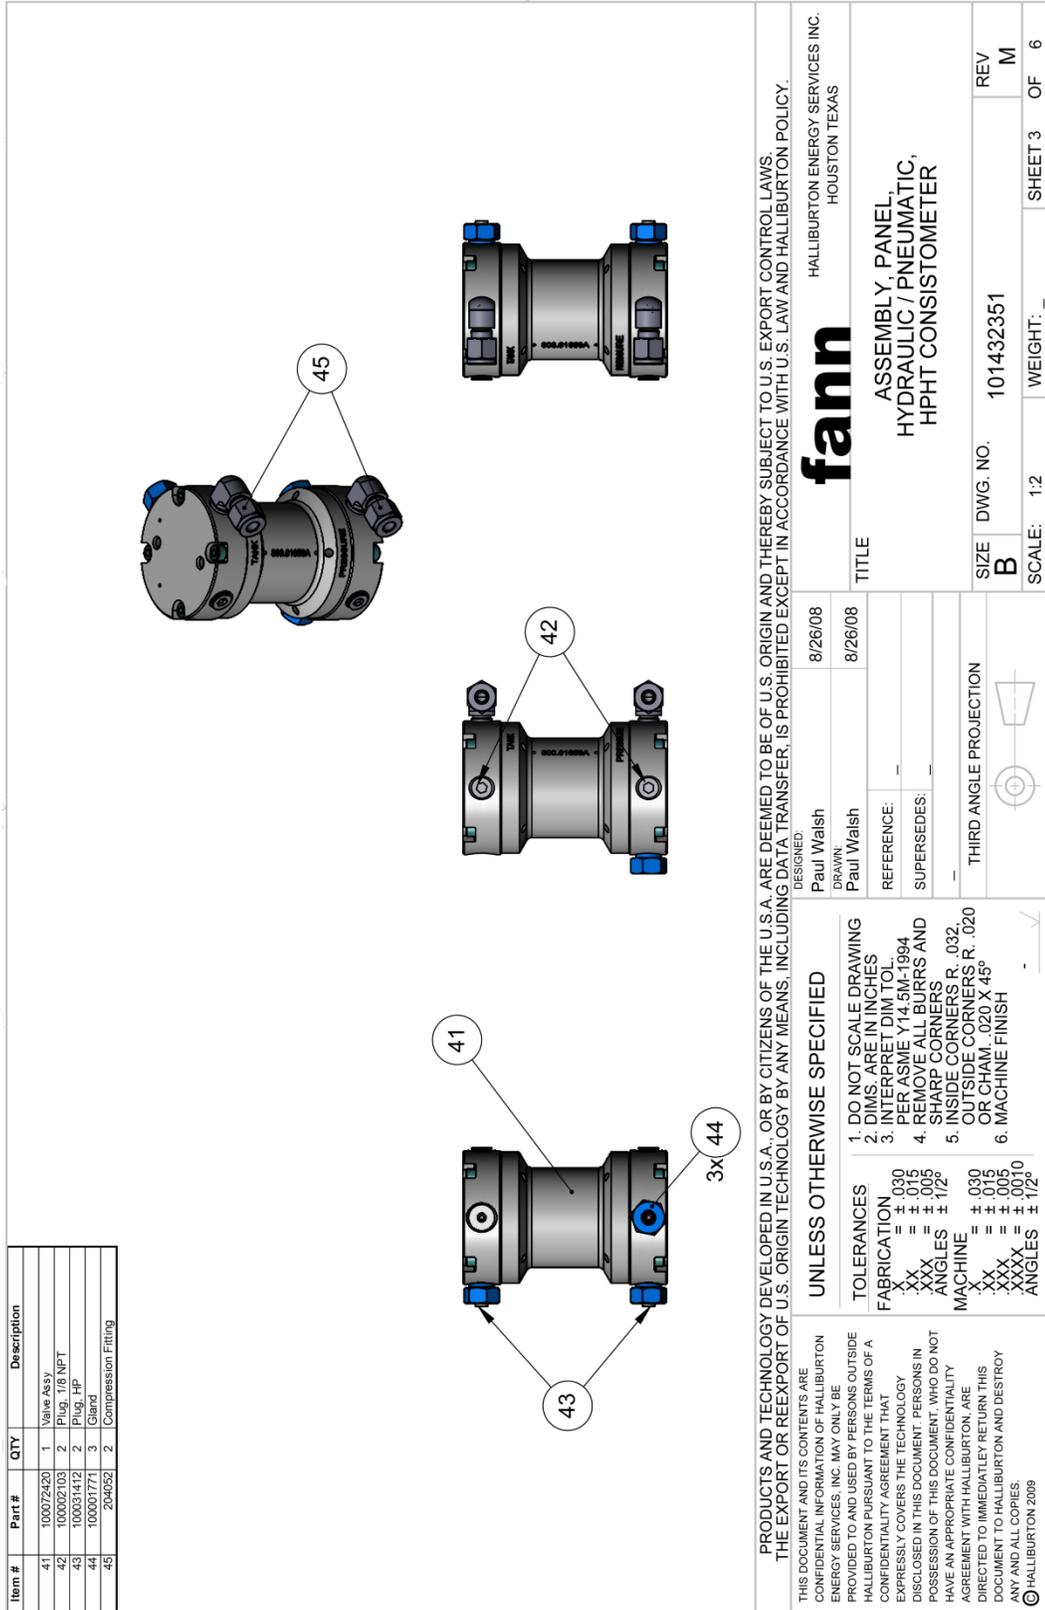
Hydraulic/Pneumatic Panel Assembly, 3/6
